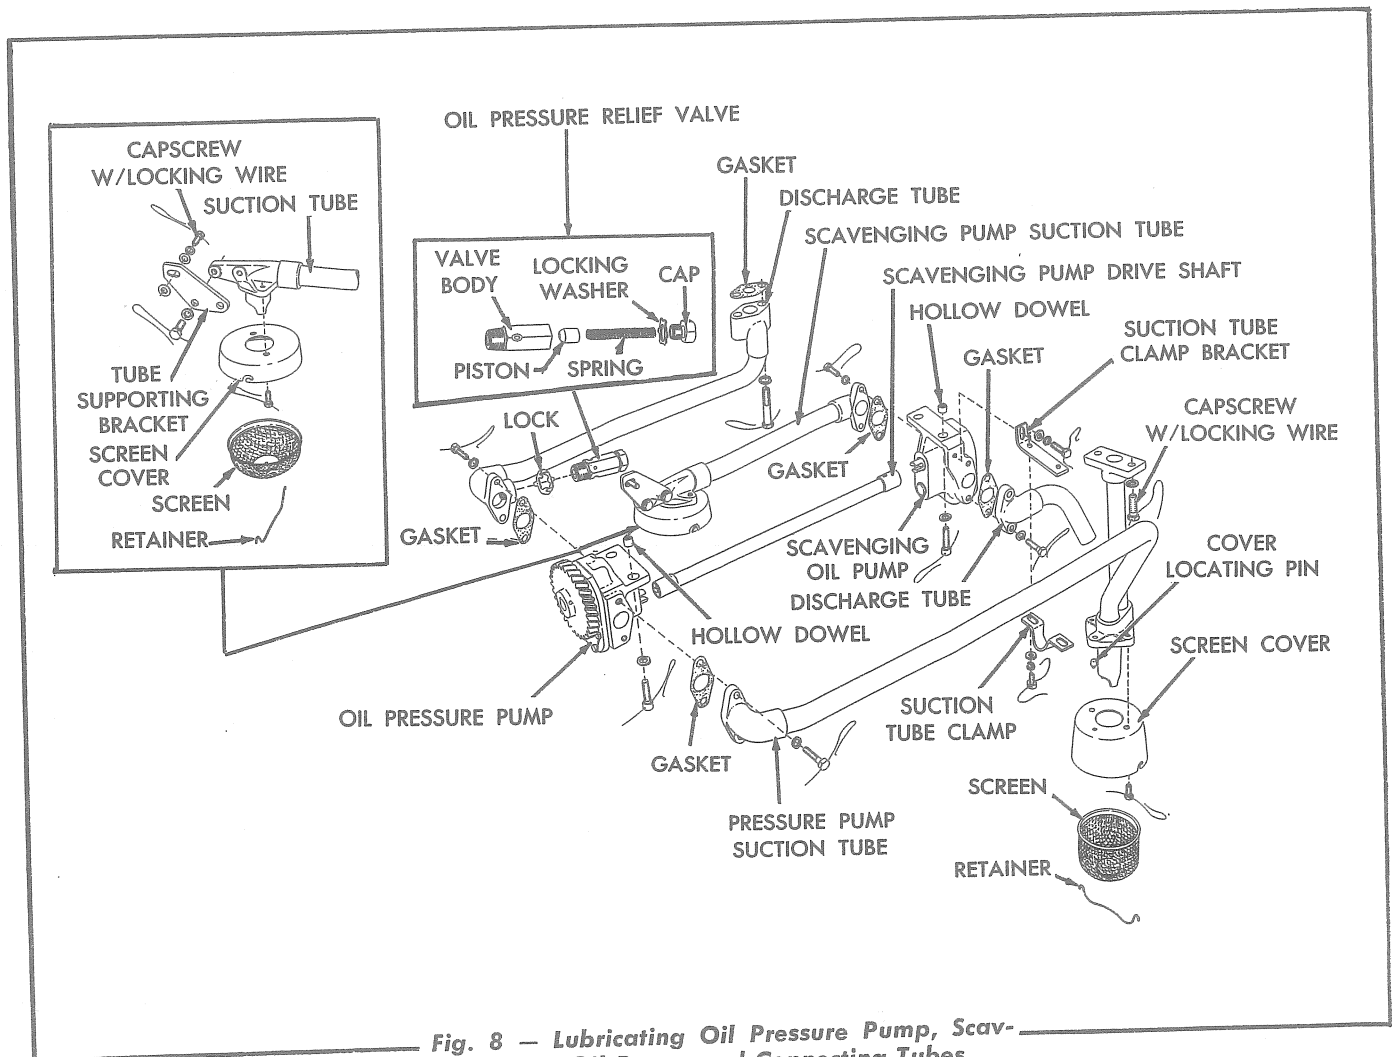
Lubricating Oil Pressure Pump, Scavenging Oil Pump, and Connecting Tubes
